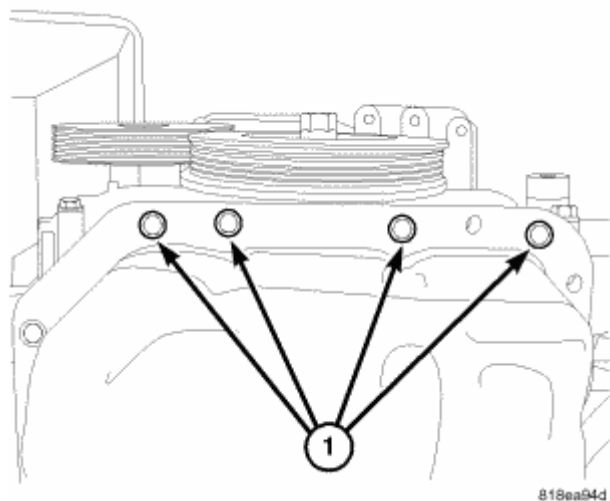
RIGHT ENGINE MOUNT BRACKET
